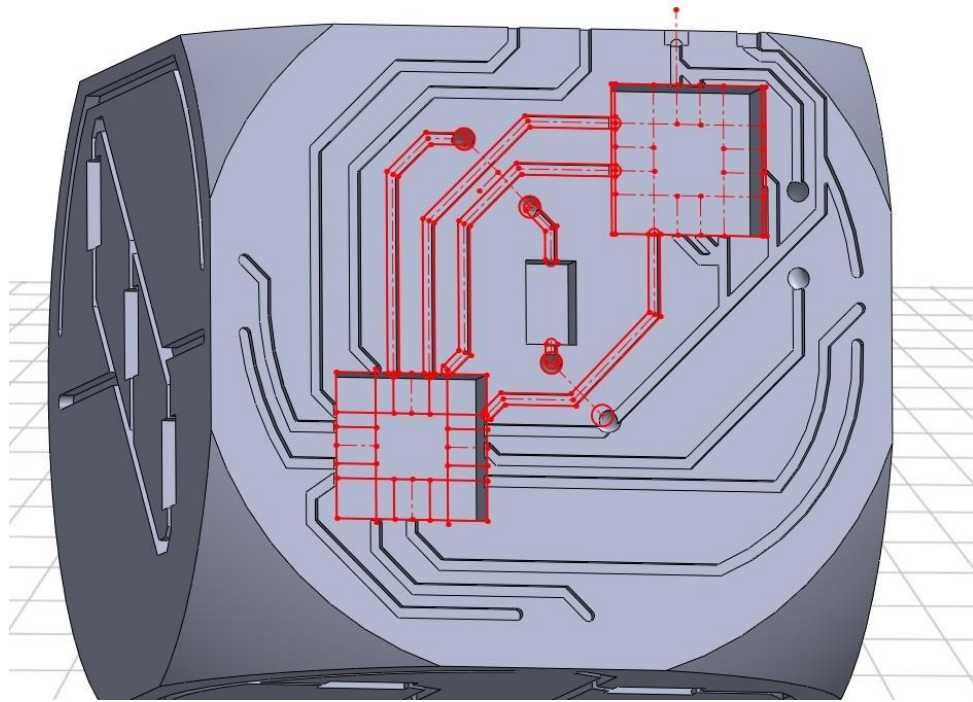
Channels are cut to provide a path for the silver ink to be deposited
